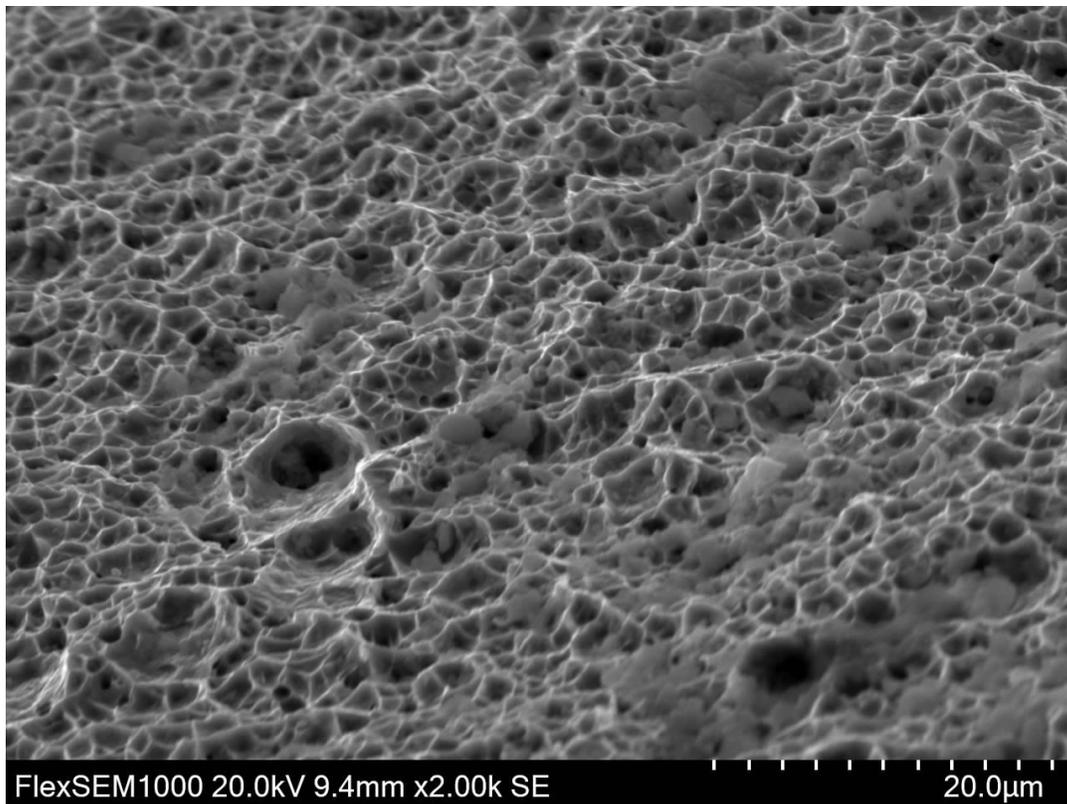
CLOSER VIEW OF AREA MARKED “FINAL FRACTURE” IN FIGURE 43, BOLT C2
